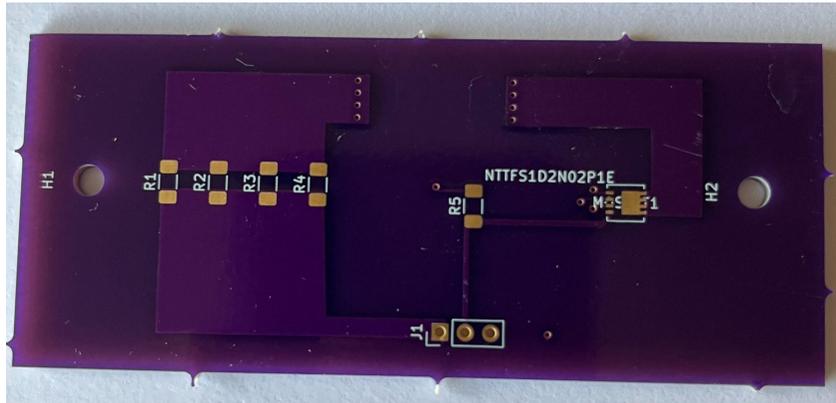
Strobe Light Board Front Unpopulated PCB
